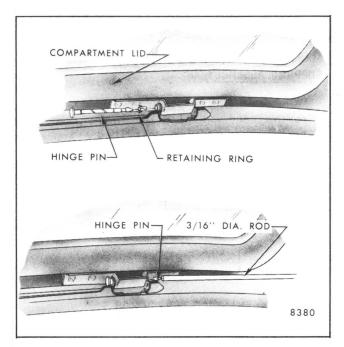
Hatchback Lid Hinge - "H-07, 77" Style - Right Side Shown
